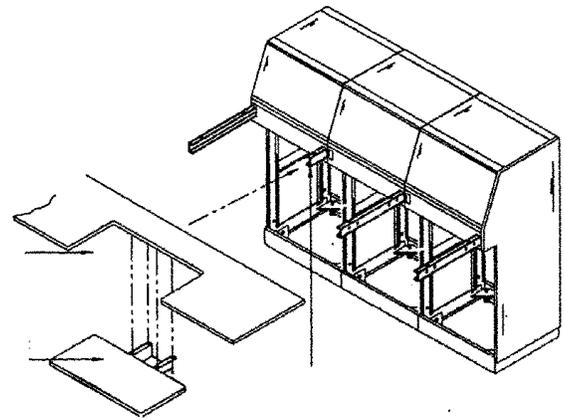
ADJUSTABLE KEYBOARD SEAT
